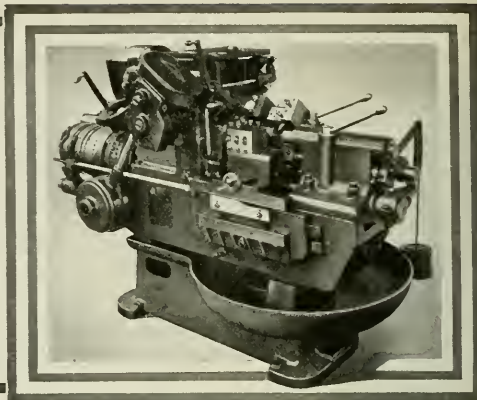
Set-up of Double-spindle Production Lathe for machining the Ball-race Seats of Automobile Front Hubs
